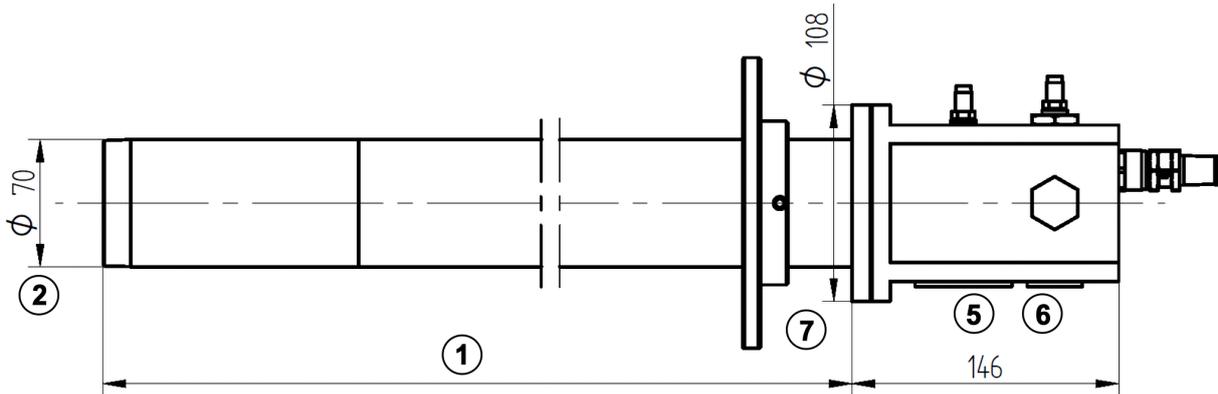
Dimensions of GF170 pilot burner design C (dimensions in mm)
